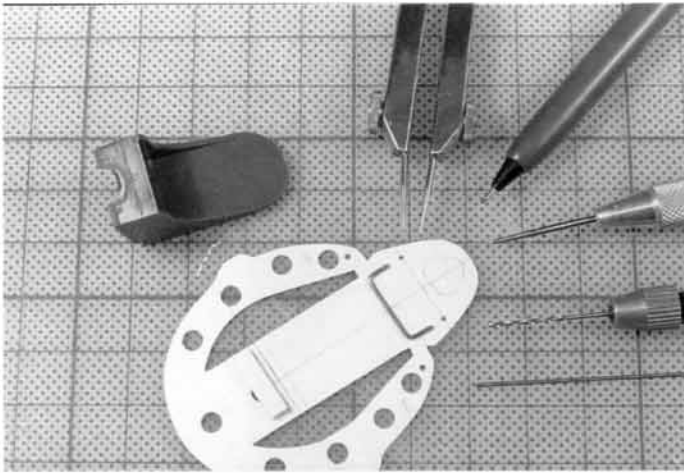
Holes are drilled to accept the seat frame bars, and the brass wire is cut to length and bent into the correct shape.
